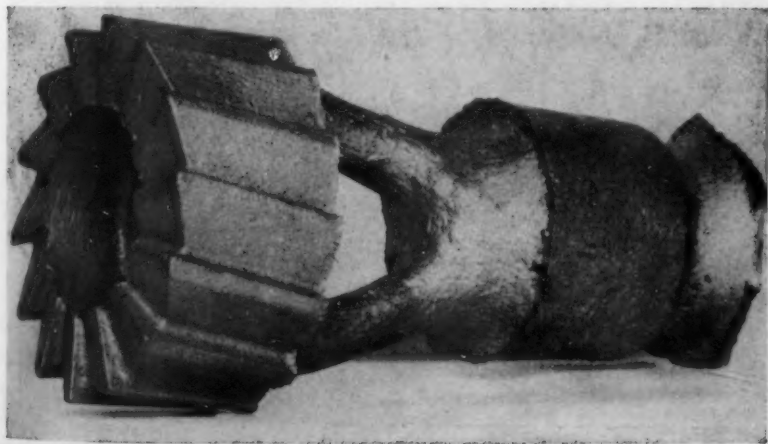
A SLAB MILLING CUTTER CASTING SPUN IN GREEN SAND.
